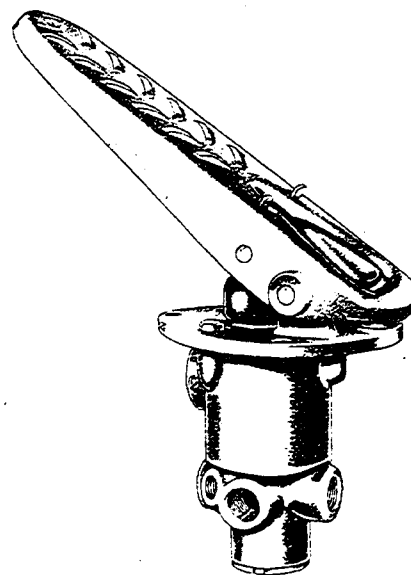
Type E-1 Brake Valve With Treadle and Mounting Plate
